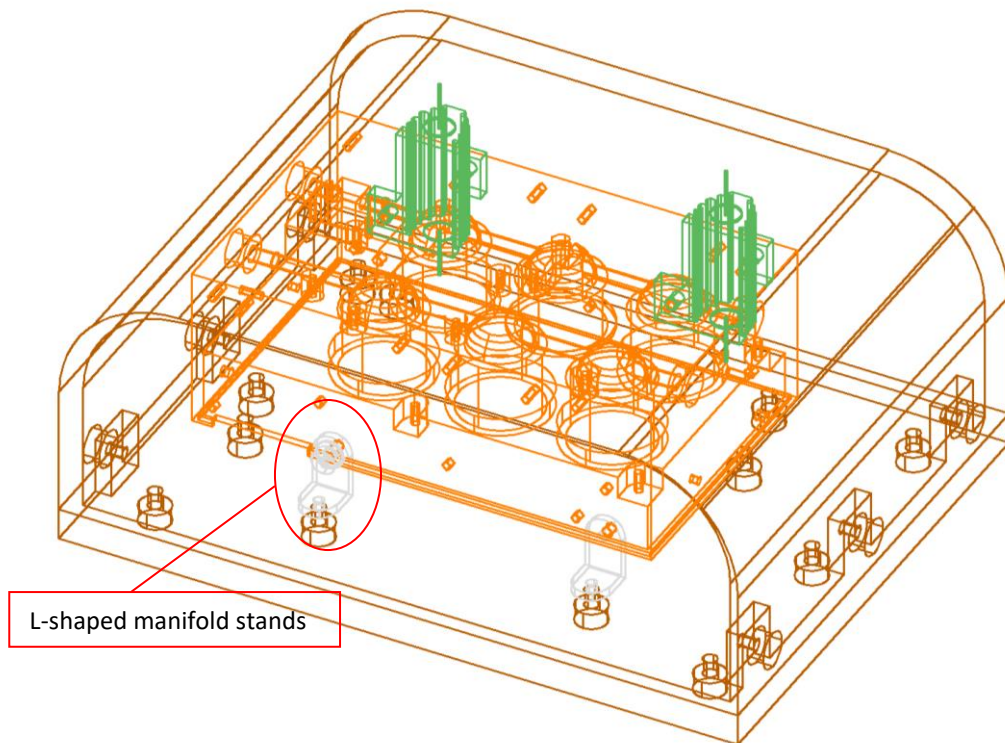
3D view of the enclosure with the manifold included along with its most bulky components.
